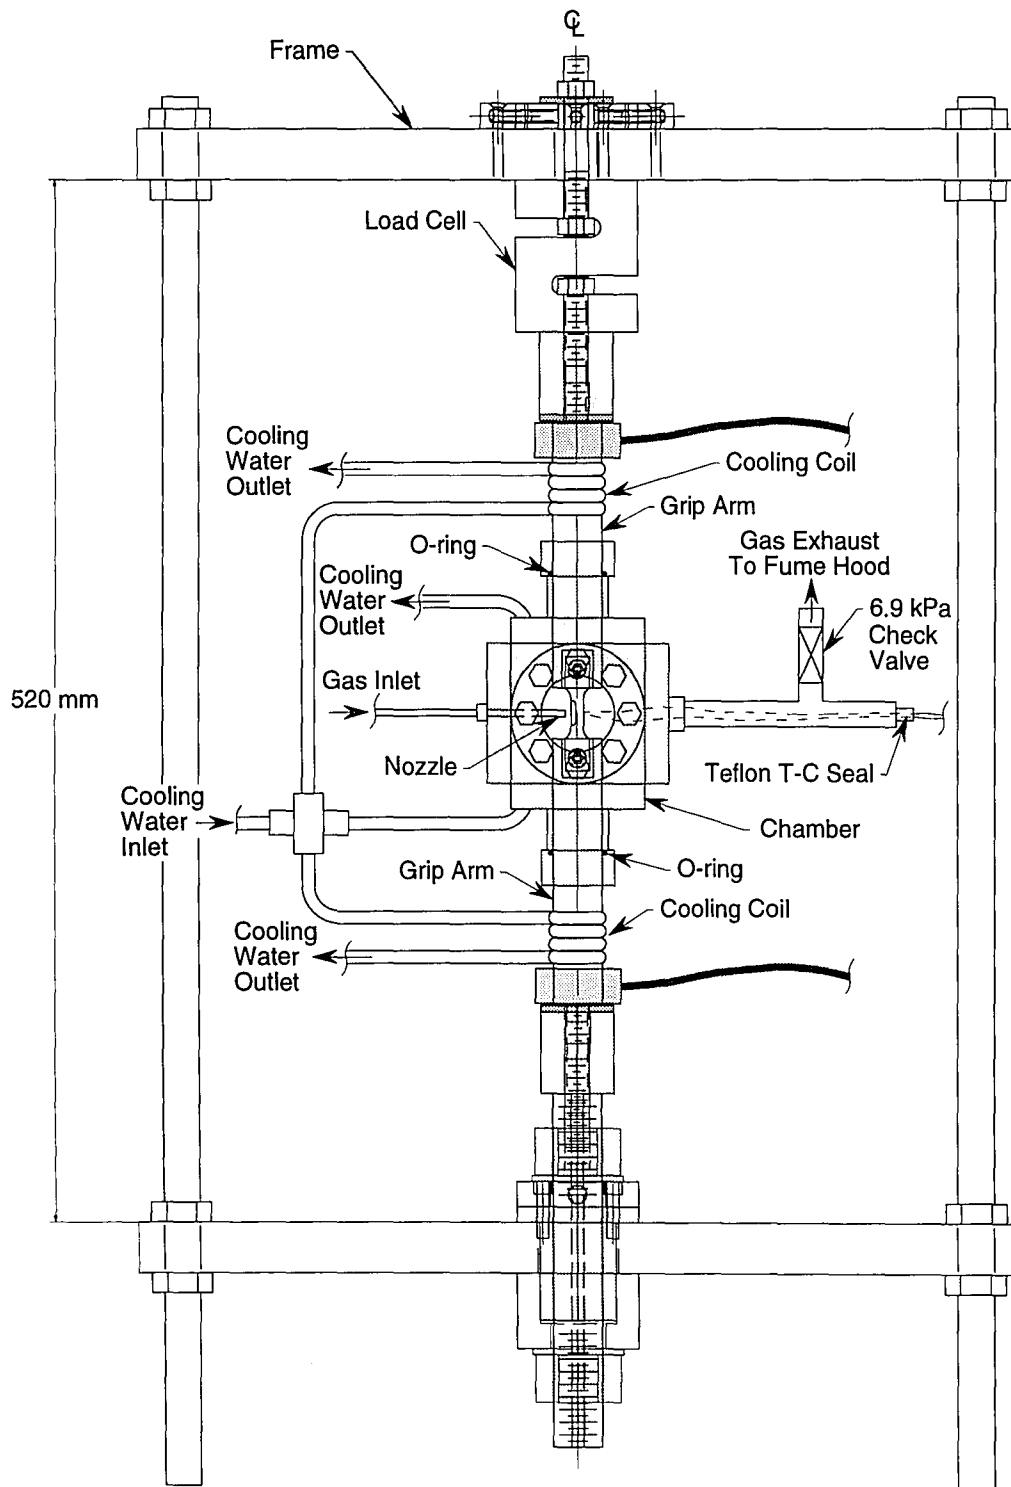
Assembly drawing of the thermal fatigue test fixture showing the environmental chamber, cooling system, and gas attachments.
